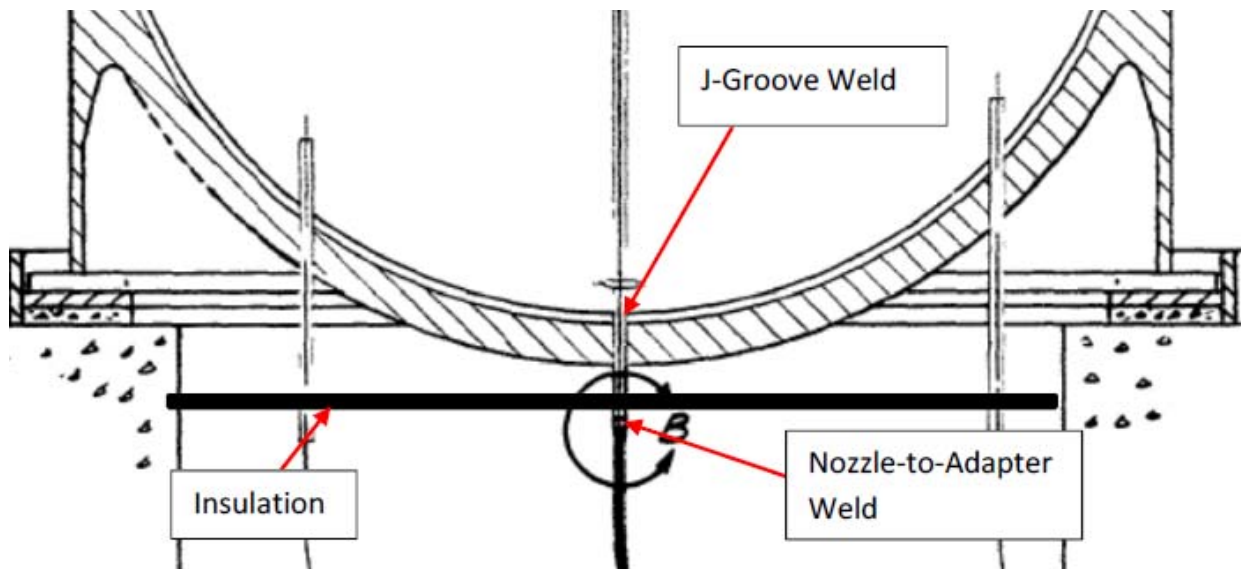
Bottom Mounted Nozzle Weld Configuration
